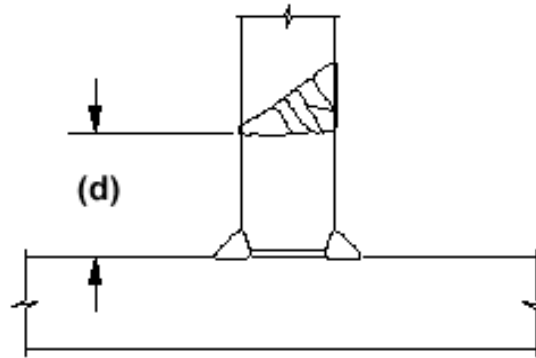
Adjacent Fillet/Groove Weld Table Member
